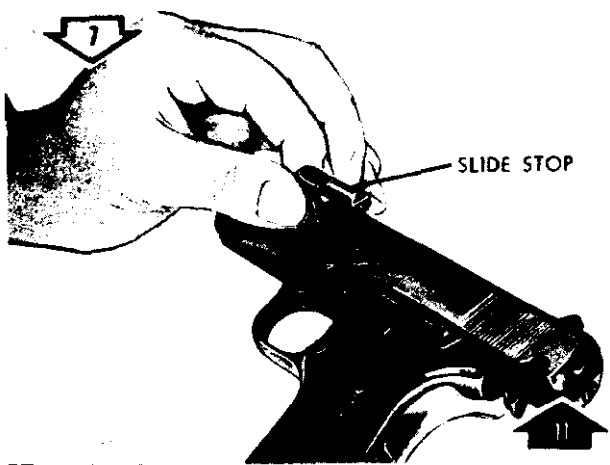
Disassembly/assembly of barrel and slide group (1 of 4).
